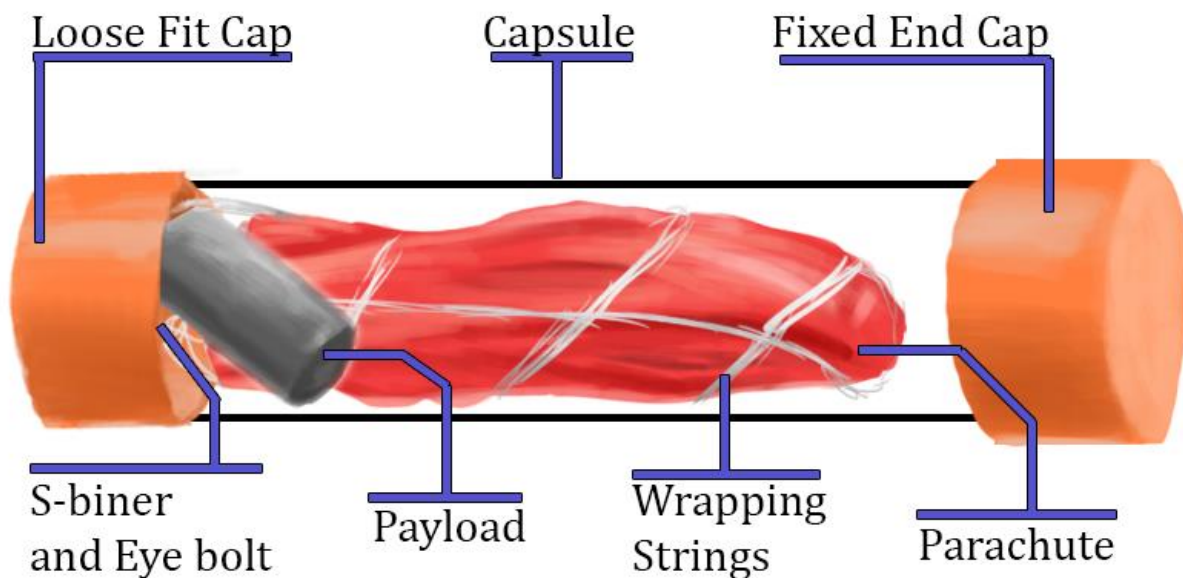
A sketch of the assembled capsule. Tape not shown. S-biner and eye bolt not visible.
